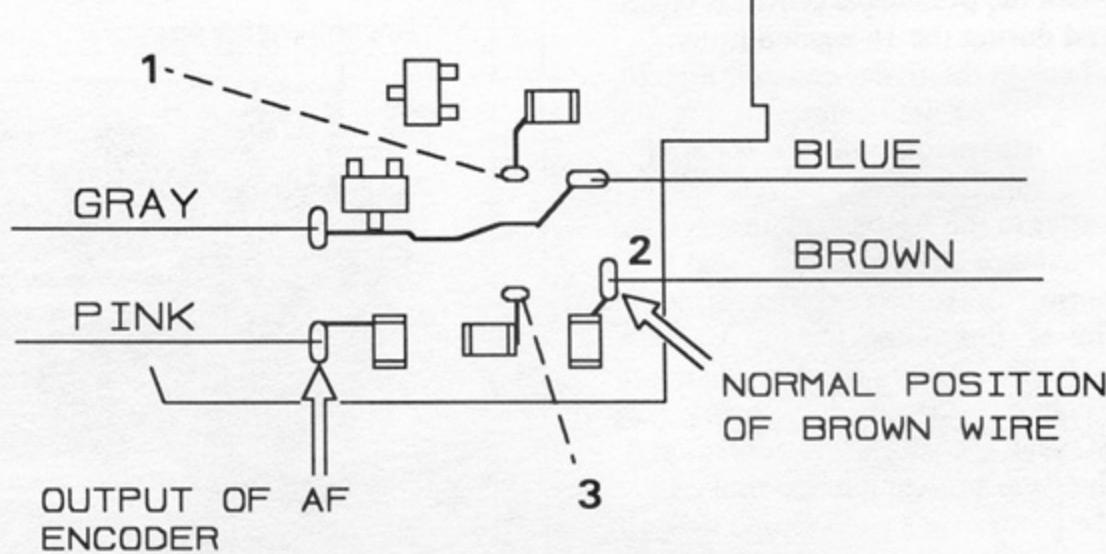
BOTTOM OF AF BASE PLATE, REWIND END
